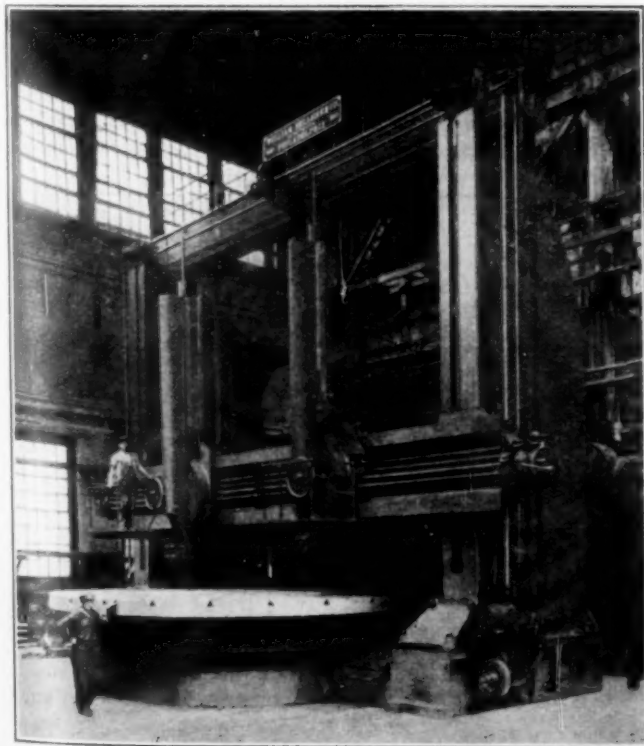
25-Ft. BORING AND TURNING MILL WITH 10-Ft. STROKE OF TOOL
